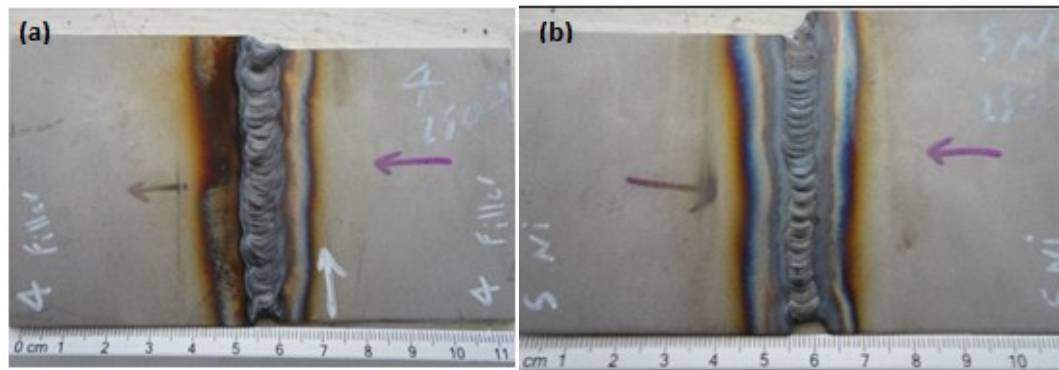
Macro image of welded samples in different conditions (a) filler metal (b) addition of nickel
